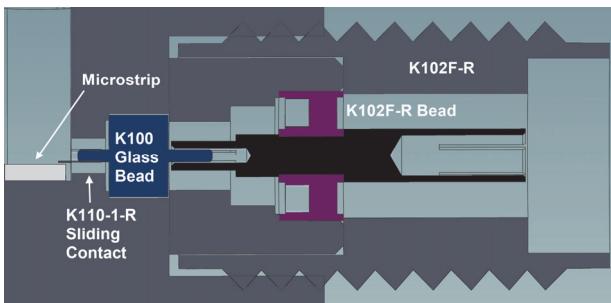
Dual bead assembly using Anritsu K102F-R, K100 Glass Bead and K110-1-R sliding contact
